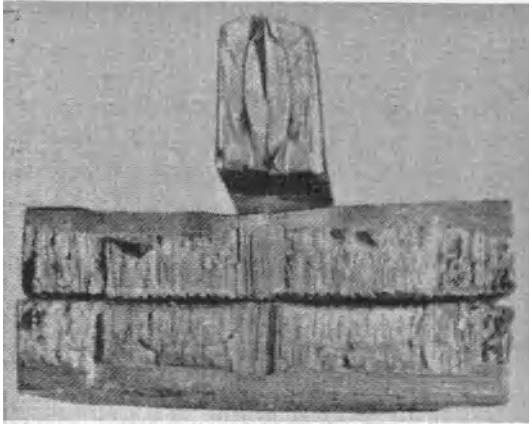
Fracture specimens of extruded light-metal sections with flaws which cannot be reliably detected by ultrasonics. Above: rolled-out shrinkage in flat material (sealed lamination); below: fibrous fracture in 60-mm round stock
